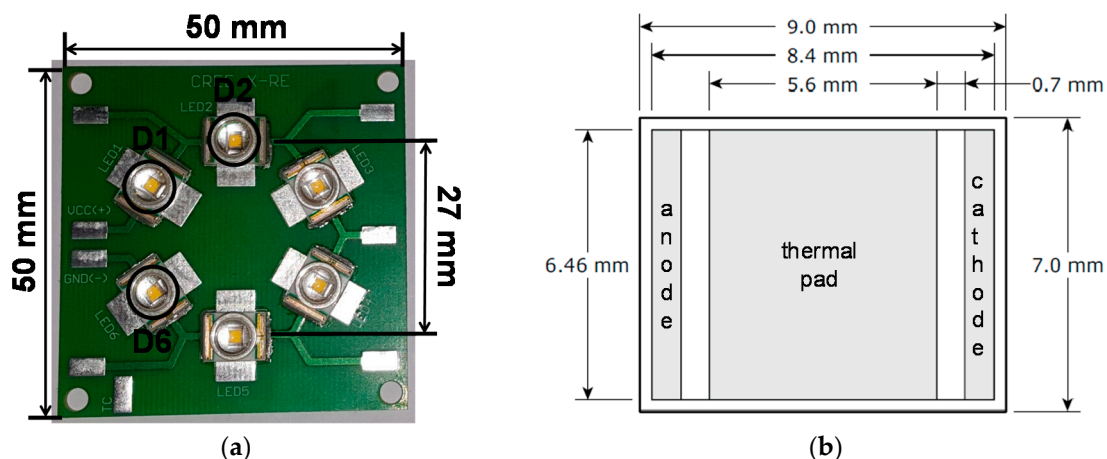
Dimensions of the investigated multi-, light-emitting diodes (LEDs) test module: (a) the photograph of the circuit layout; (b) the LED electrode layout at the bottom side of the package.
